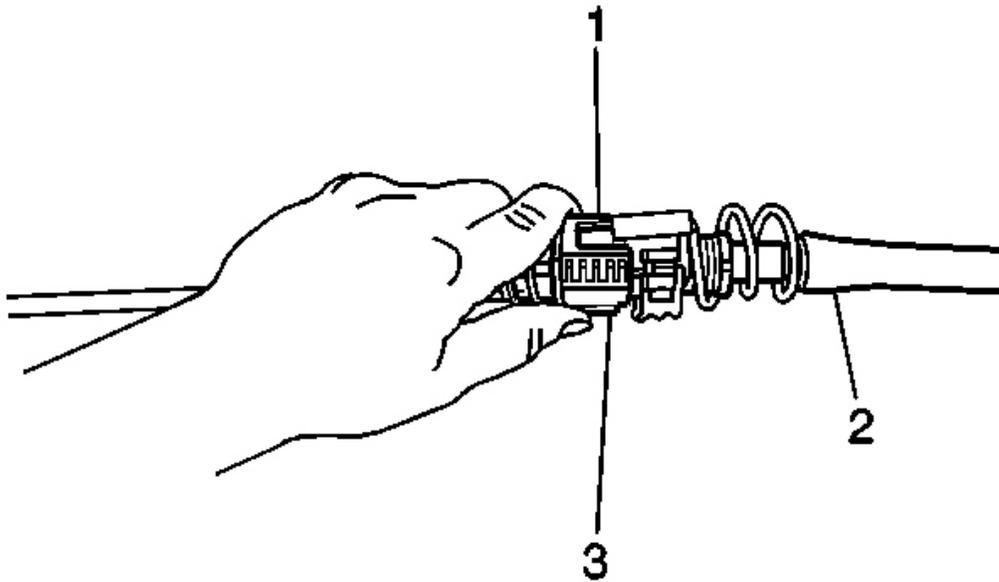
Releasing Shift Cable End & Pulling White Cover On Shift Cable End
